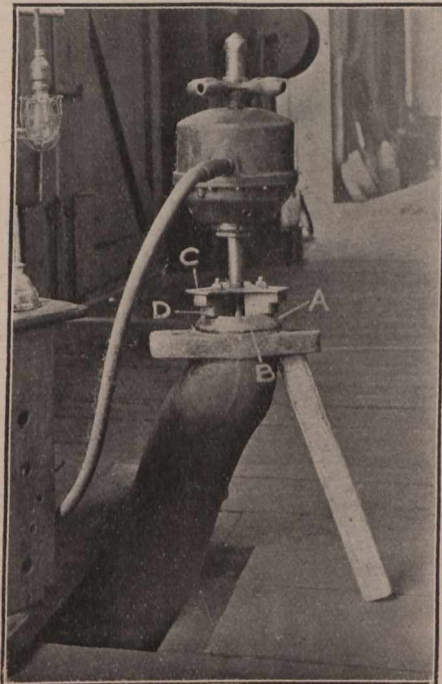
Grinding the Ball Seat in the Smoke-Box Steam Pipe.
